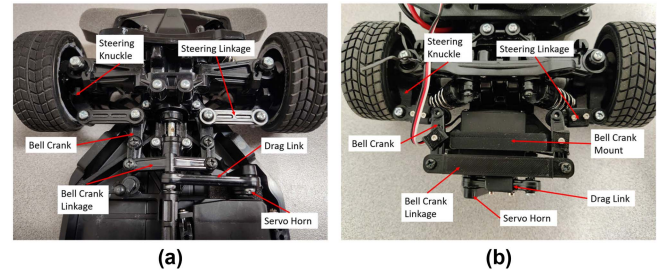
(a) Standard front wheel steering assembly for the Tamiya TT-02 RC car. (b) Custom rear wheel steering assembly.
